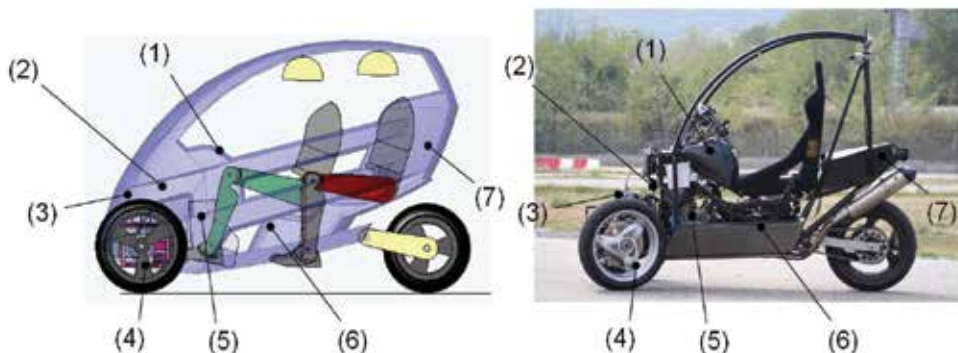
Vehicle layout showing control handlebars (1), tilt/steer sensors (2), tilt actuator (3), wheels and hubs (4), internal combustion engine (5), room for batteries (6) and passenger/luggage/acquisition system (7).
